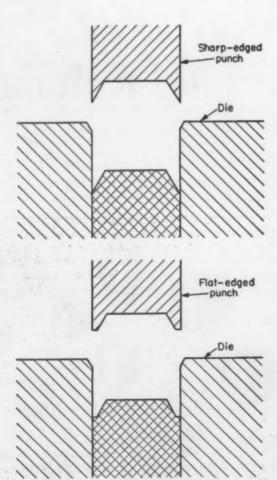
Left—Formation of bearing chamfer with sharp edged punch and long-life flat-edged punch
